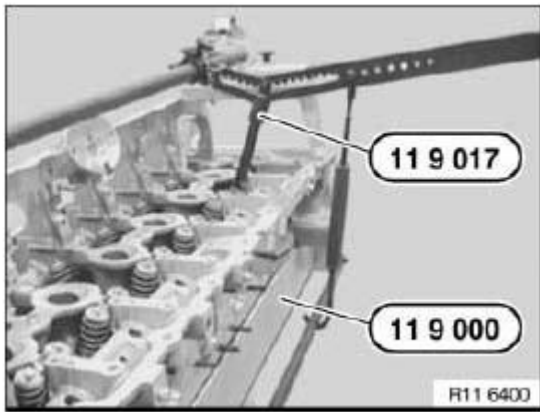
Identifying Special Tool (11 9 000) And (11 9 017)
